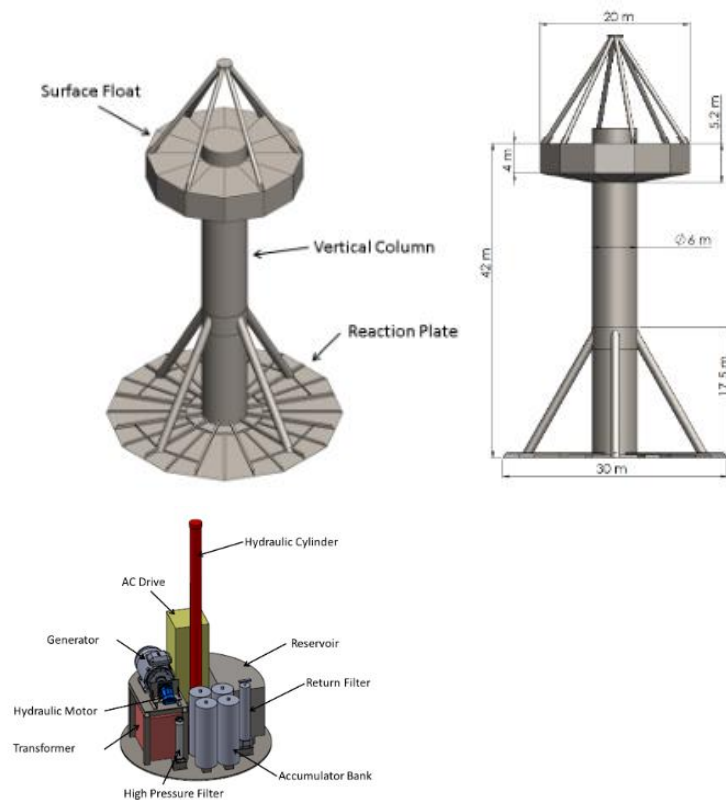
RM₃ DEVICE DESIGN AND DIMENSIONS
